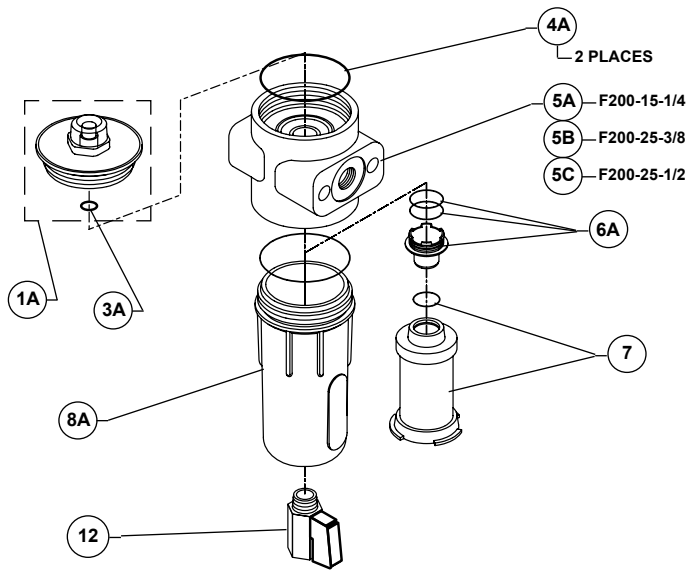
B F200-55-1/2 THRU 500-2 REPLACEMENT PARTS
